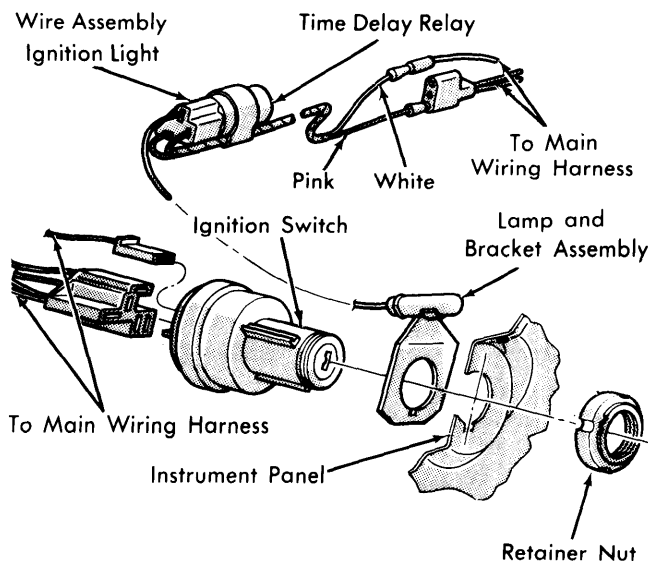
Ignition Switch for Chrysler Lt. Trucks
